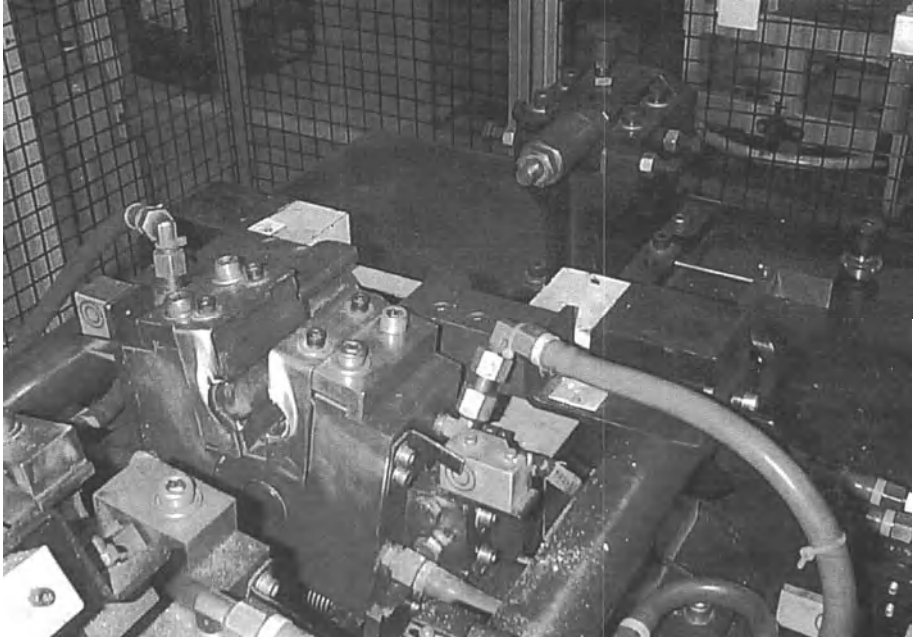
Detail of the machine jaws presented in Figure 9.11
